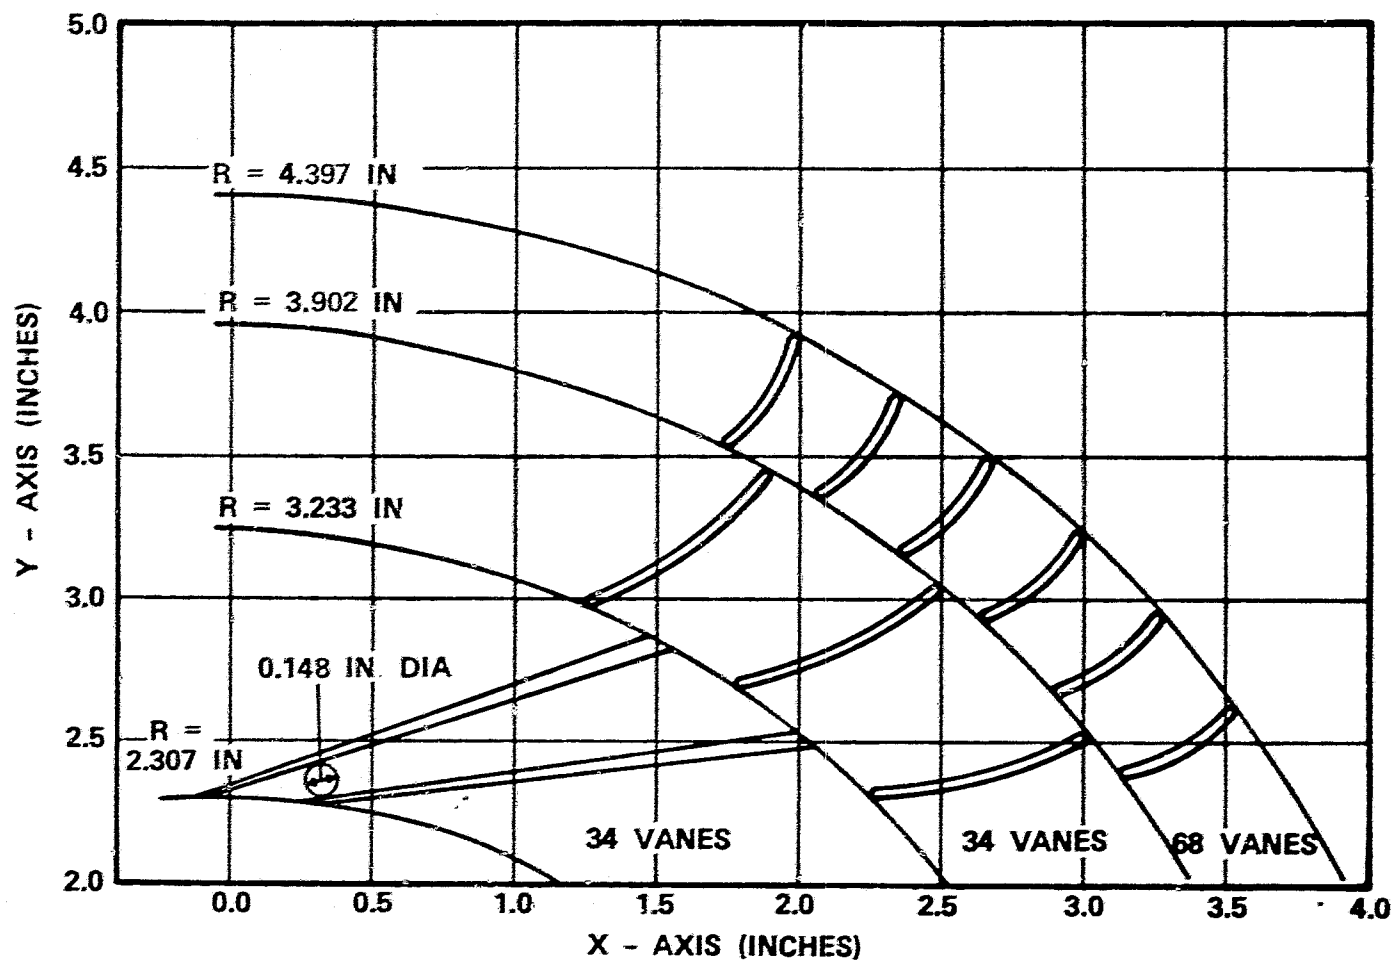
AGT101 Diffuser and Deswirl Vane Assembly Axial View.
